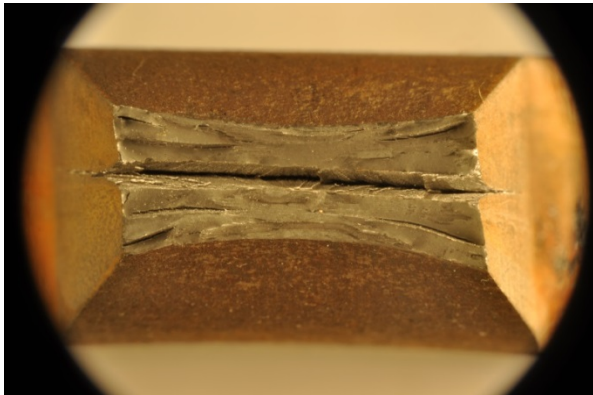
Top view of fracture surface for expanded and strain-aged longitudinal tensile test specimen 90° from weld seam.
